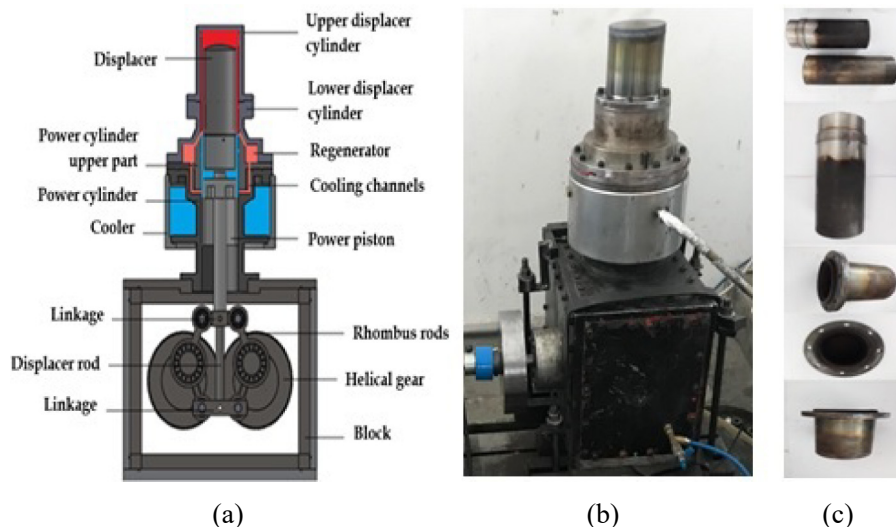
(a) Schematic view of the beta type rhombic drive Stirling engine (b) manufactured Stirling engine, and (c) displacer driving mechanism.
